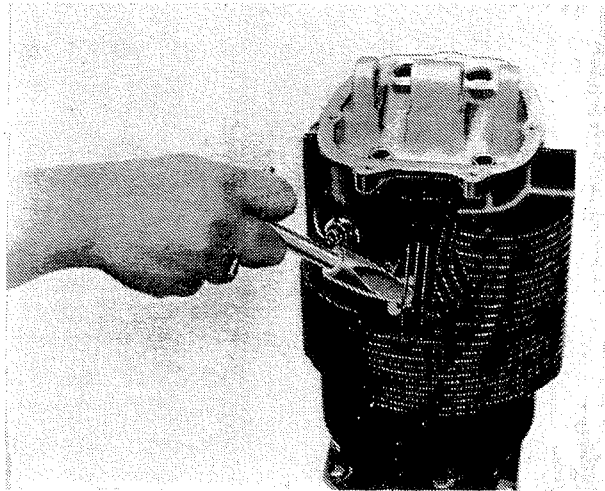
C. REMOVING SPARK PLUG HOLE HELICAL COIL INSERT
